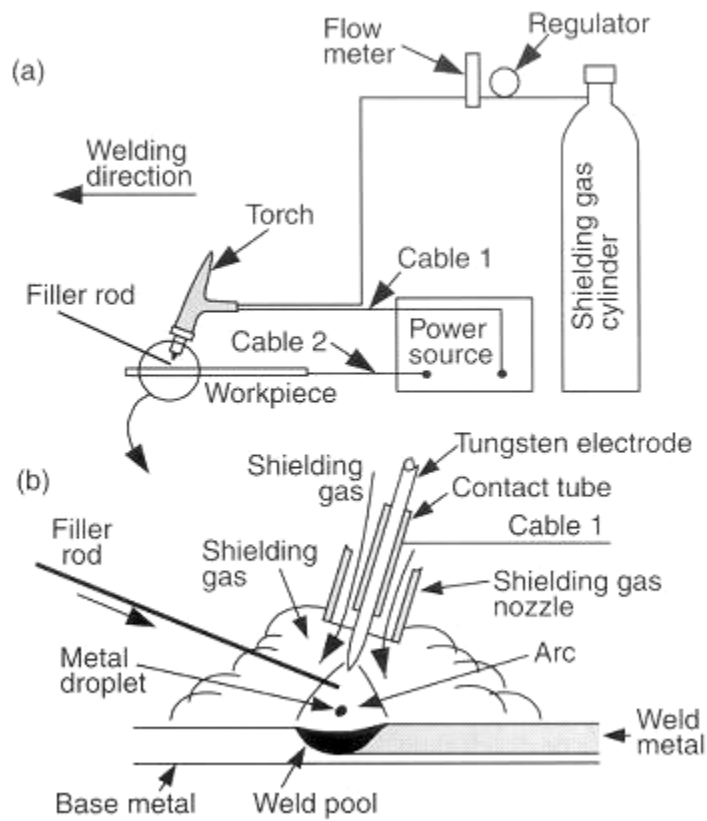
Gas Tungsten Arc Welding: a) overall process, b) welding area enlarged [30].
